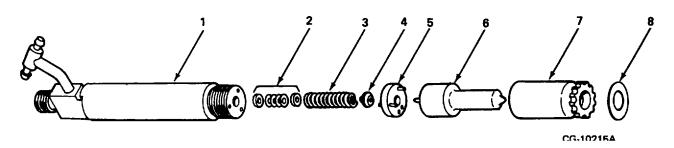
Exploded View of Fuel Injection Nozzle and Holder Assembly
